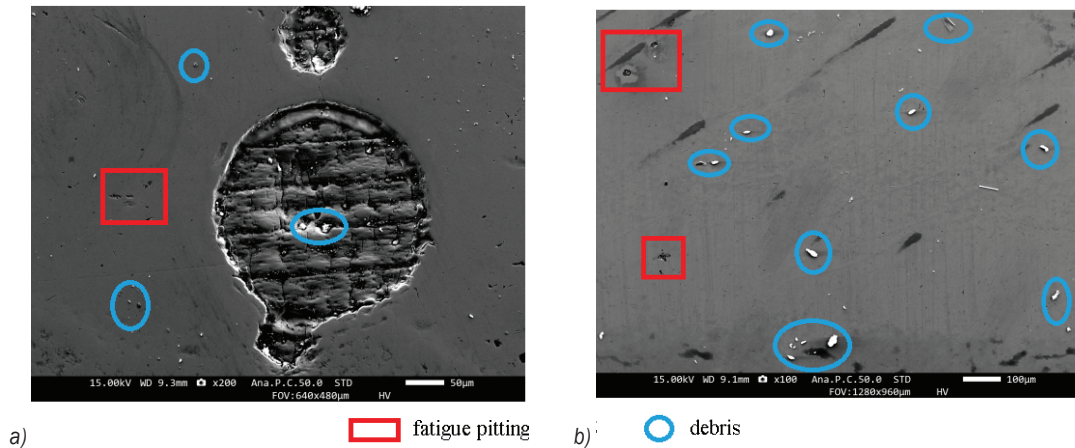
Worn surfaces of shaft washer of a) G06 and b) G08 under starved lubrication
